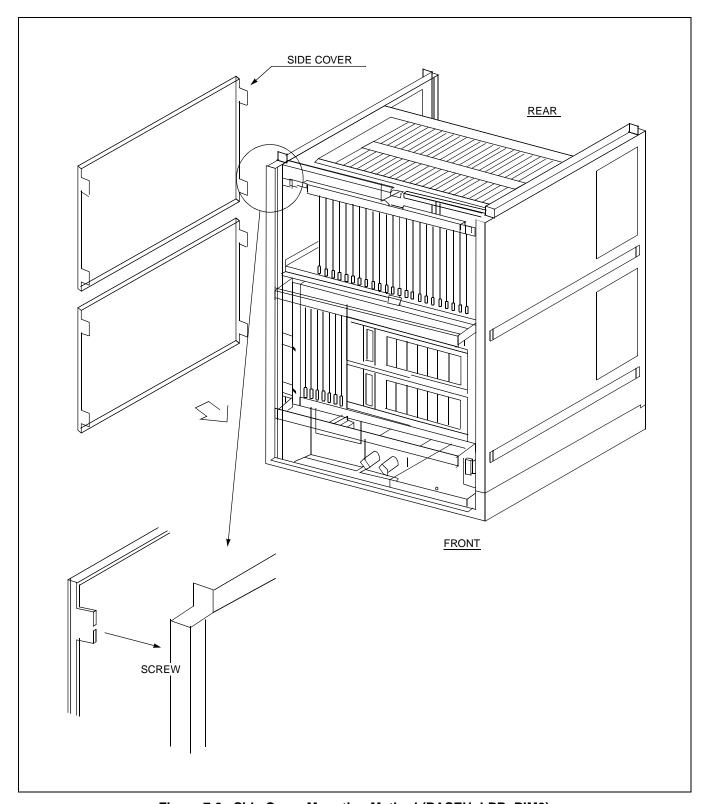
Side Cover Mounting Method (BASEU+LPR+PIM0)
